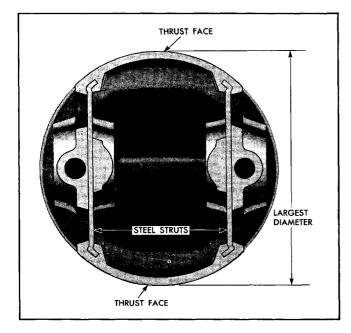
Cross Section of Piston at Point ¾" Below Centerline of Piston Pin
